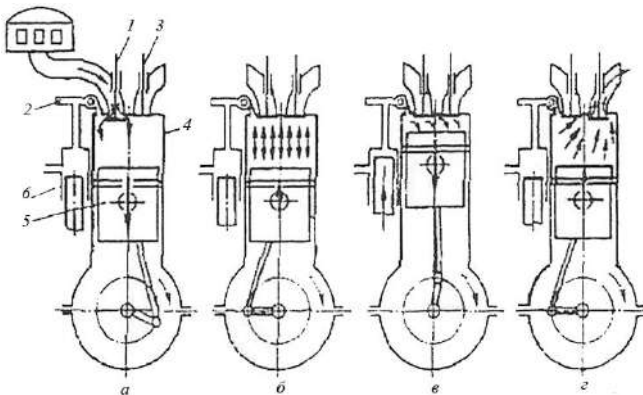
The working cycle of a single-cylinder four-stroke diesel engine:
